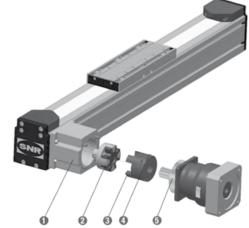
Drive assembly on Linear Axis with toothed belt drive and coupling cone
